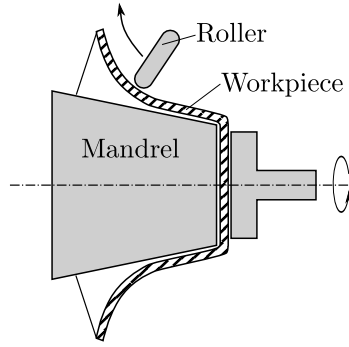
A cross-sectional schematic of a conventional spinning process indicating the workpiece being deformed onto the mandrel as it is rotated.
